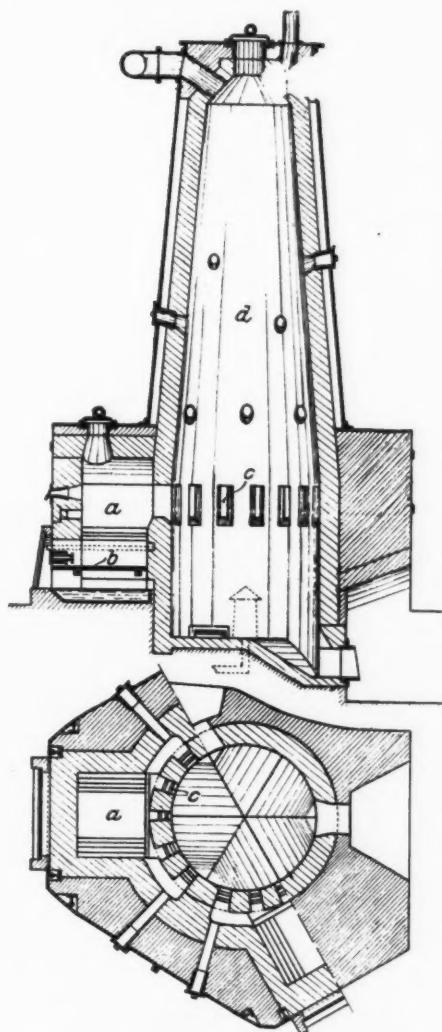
A third improvement in the design of producer gas pits, the fuel space being hopped so that the producer might be more easily fired from the top
